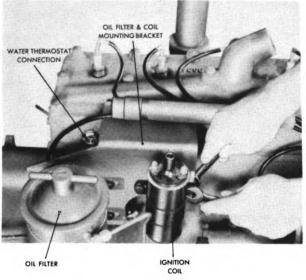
Showing mounting bracket for oil filter and ignition coil.
